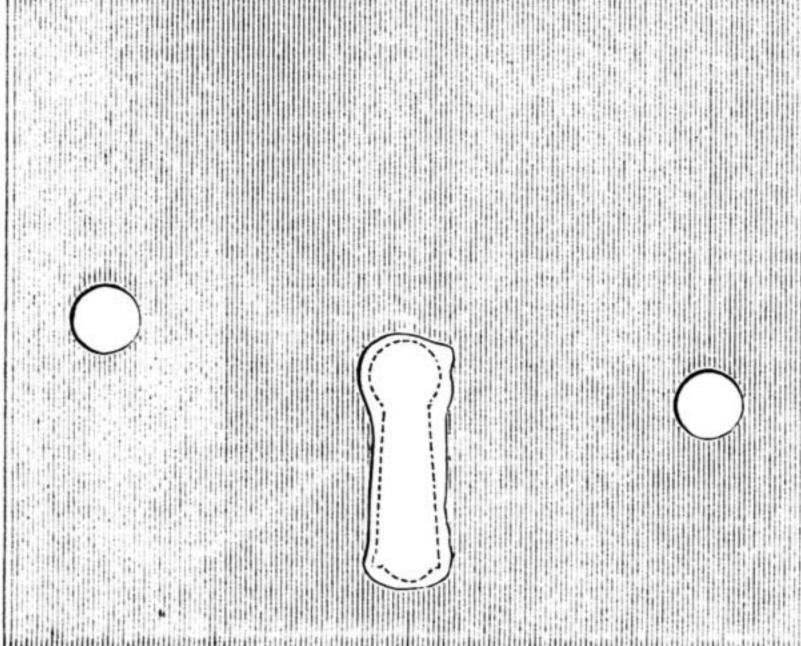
Covering Plate of Lock showing Worn Keyhole.
